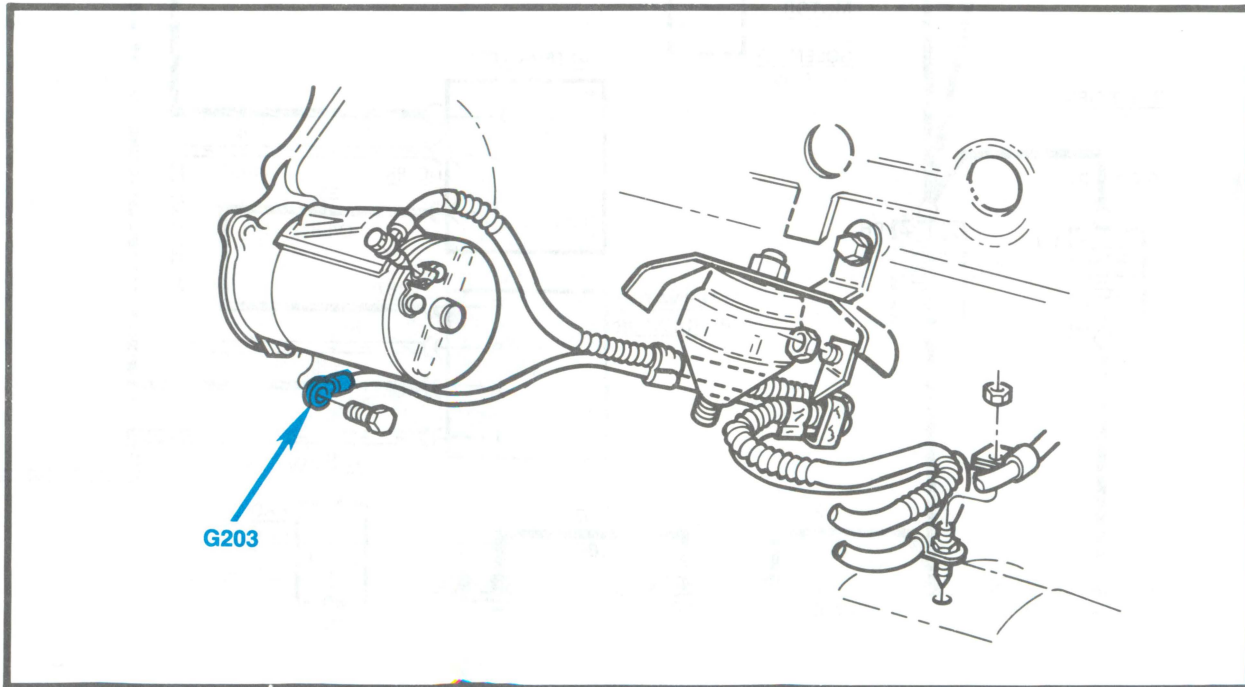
Lower RH Side of Engine (4.9L 6 Cyl. ONLY)
